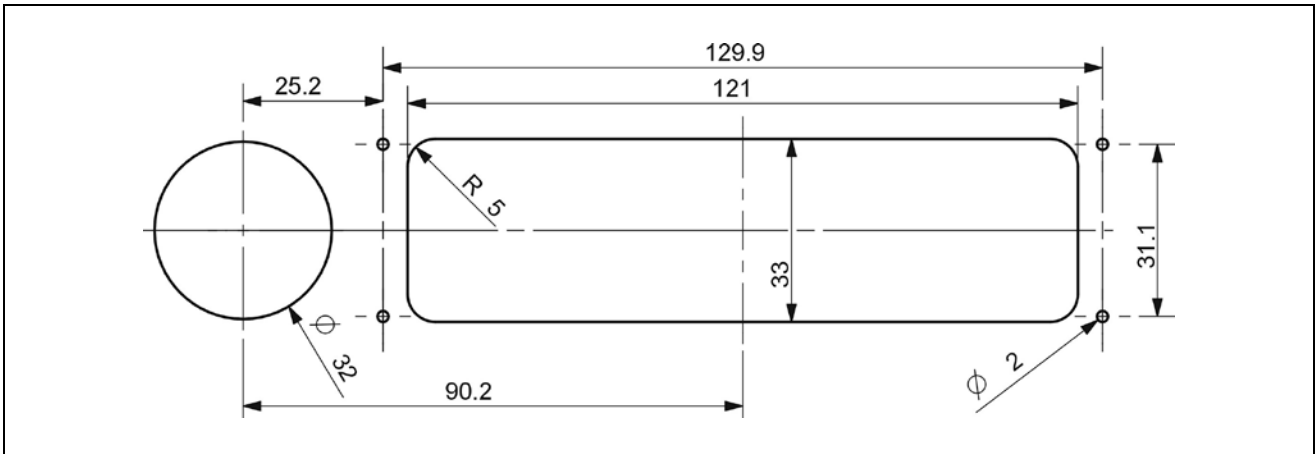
Fixing hole positioning diagram of HCS-4325/26 series congress unit with HCS-4327HD/50 (unit: mm)
